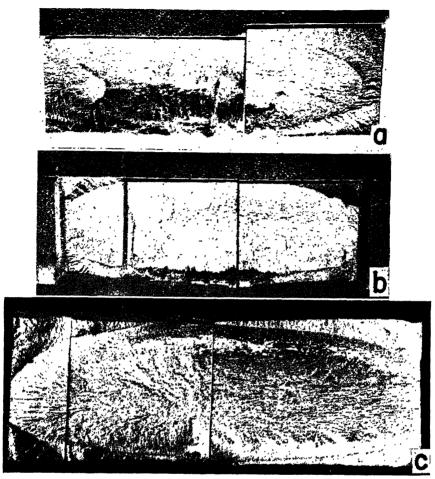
Three Internal Shelling Cracks Produced in Laboratory Rolling-Load Machines Opened Up.
